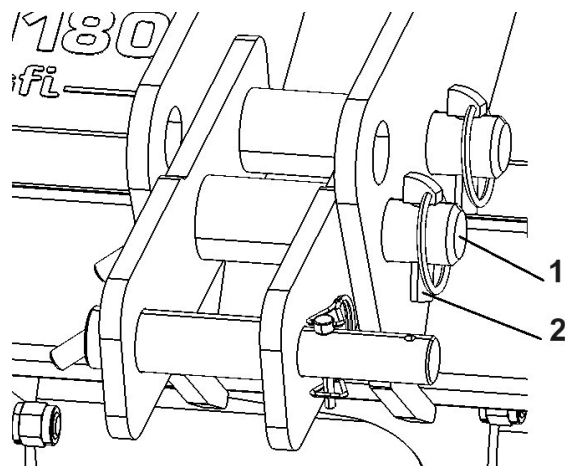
Floating Position of the Machine: 1 – pin, 2 – cotter pin.
